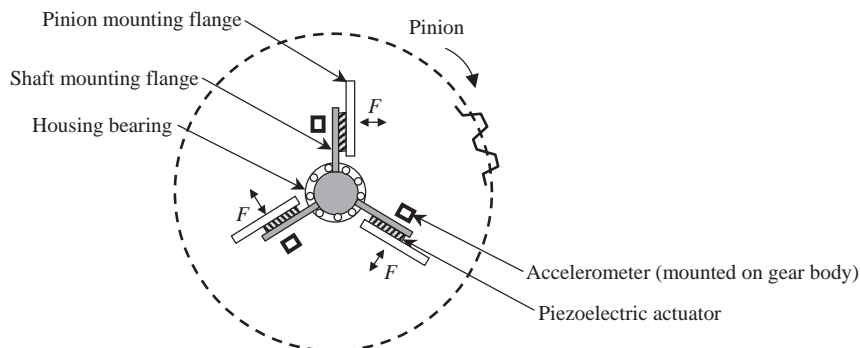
Active control of gear–shaft torsional coupling (concept 2).
